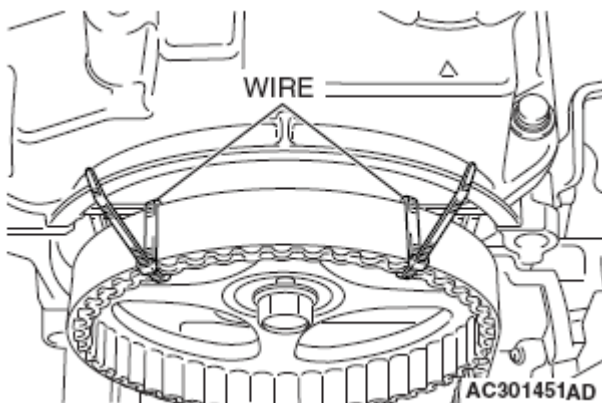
Securing Camshaft Sprocket And Valve Timing Belt With Wire
